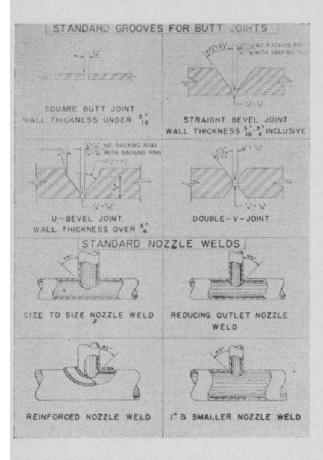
Welding technique—standard grooves for butt joints
